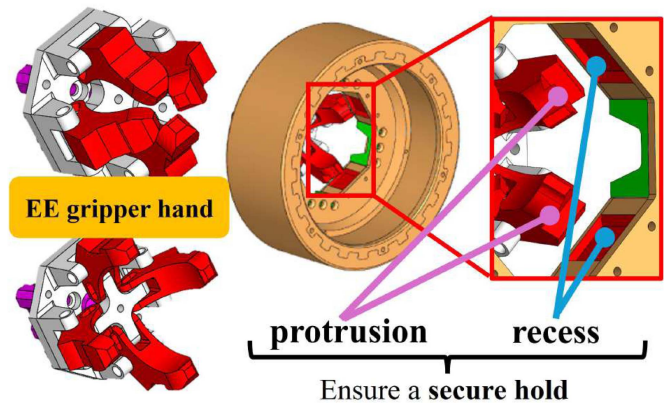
The EE gripper hand has a compact structure with reduced thickness. Protrusions on the EE gripper hand and corresponding recesses on the EE enable a secure hold.
